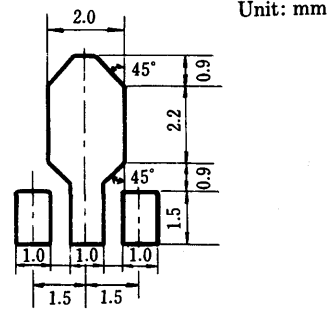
Minimum size of mounting pad size for supermini-transistors
